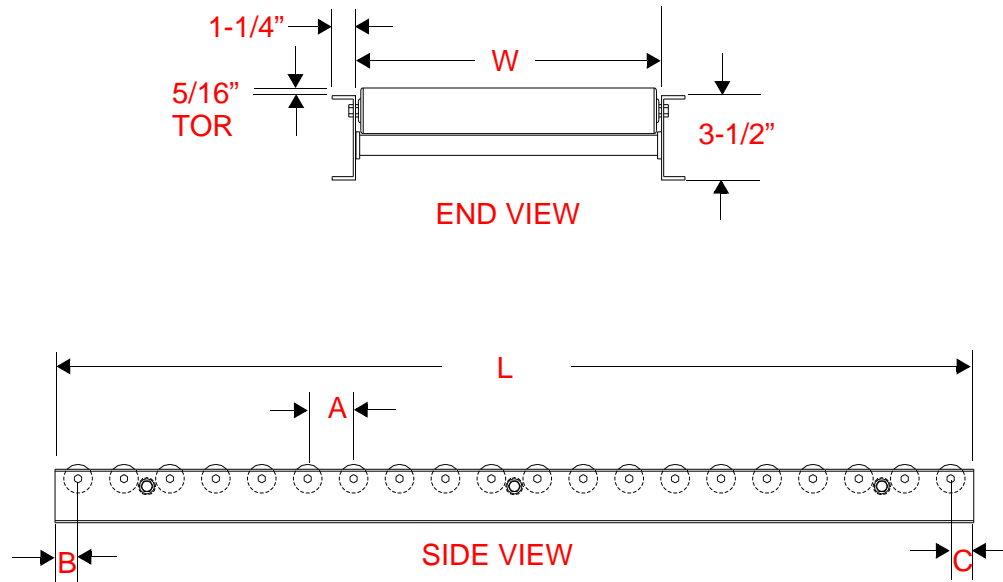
Medium Duty Roller Conveyor - Straight Section
